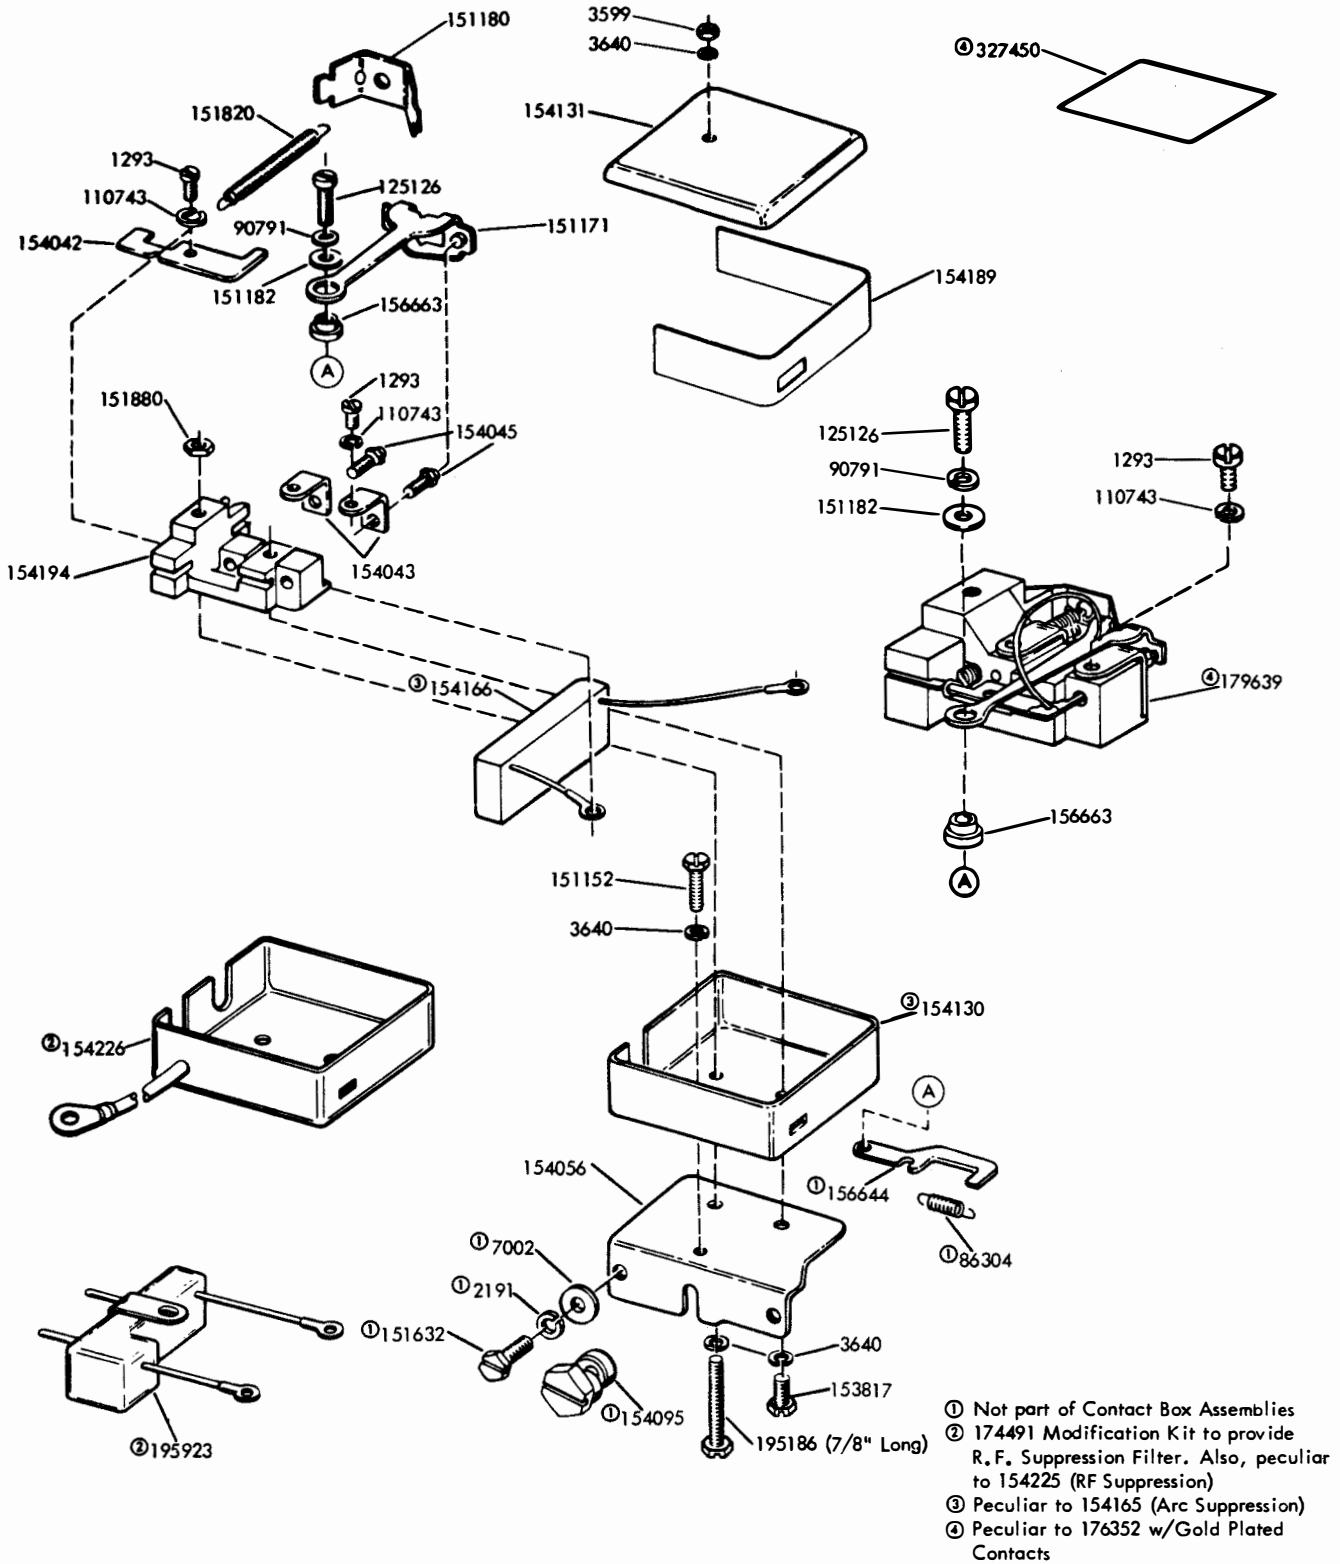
Signal Generator Contact Box Assemblies 154165, 154225, and 176352 - Used on High-Level Sets
